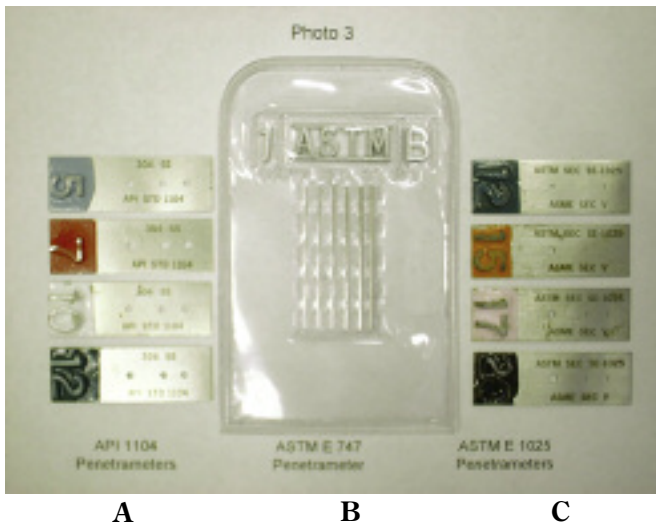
The different types of penetrators referenced in API 1104. A — API 1104 type; B — ASTM E 747 type; and C — ASTM E 1025 type.
